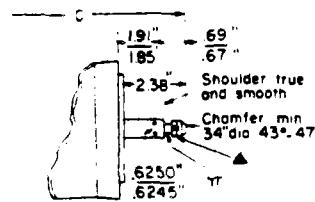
Threaded-shaft dimensions for General Electric 40-size TEFC motors as on NEMA 56J jet-pump motors. φ
